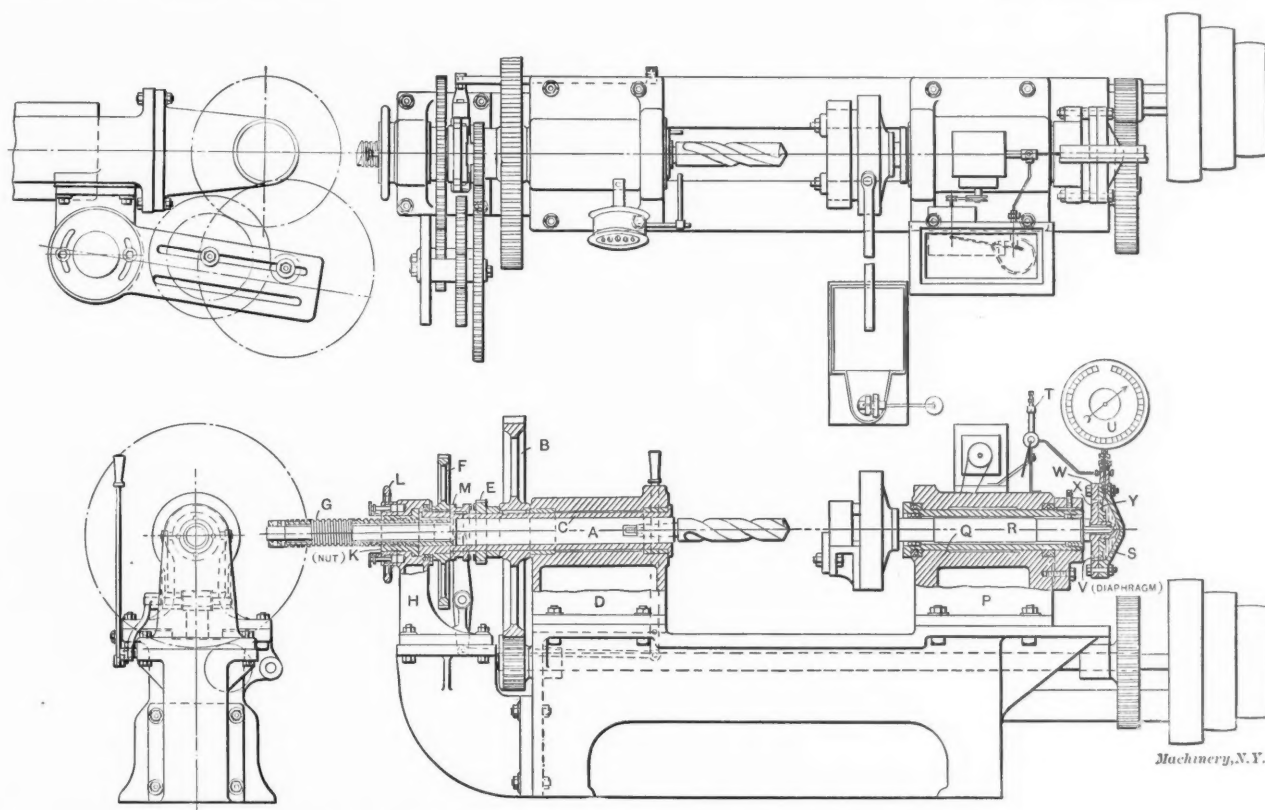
Section and Elevation of Apparatus used in Second Set of Experiments
